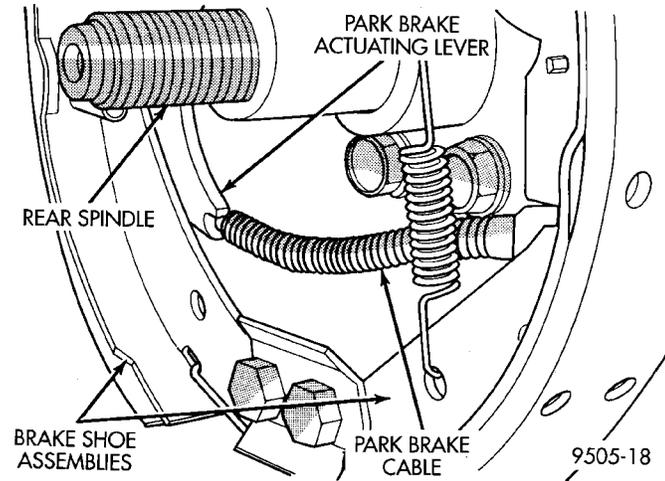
Park Brake Cable Attachment To Actuating Lever
